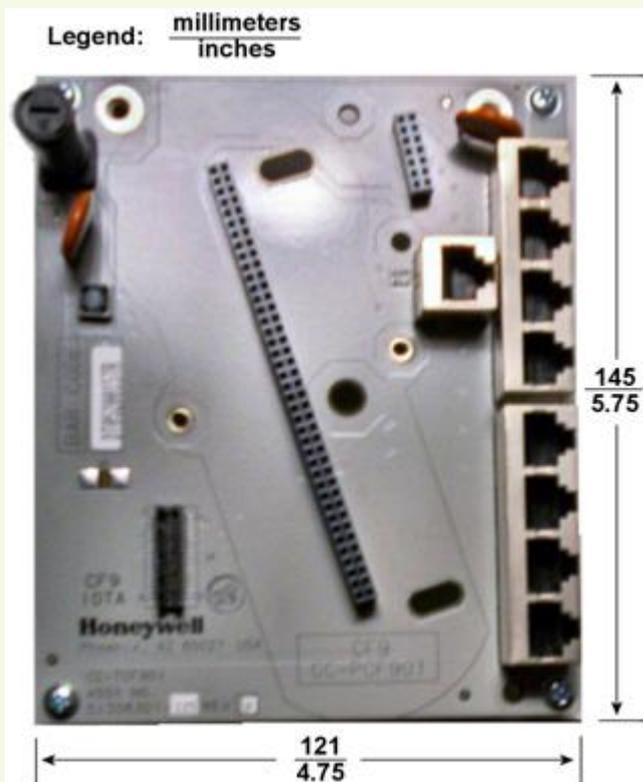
Mounting Dimensions for CF9 IOTA CC-TCF901
